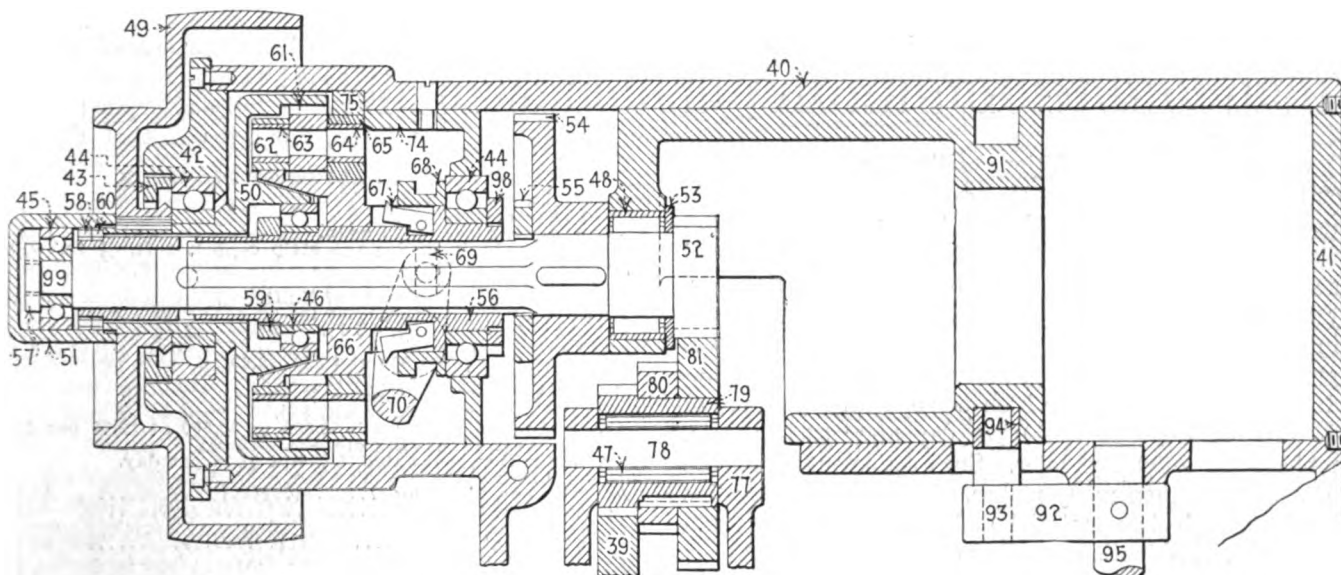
SECTION THROUGH BORED PORTION OF THE GEARED-HEAD CONSTRUCTION COVER
